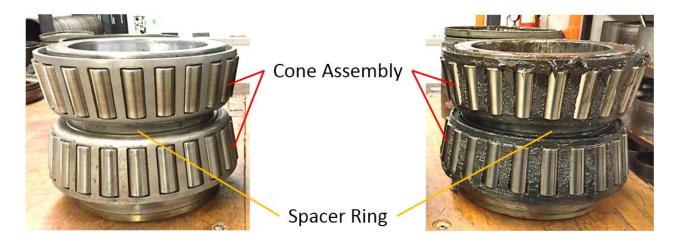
Photograph of clean (left) and lubricated (right) bearing components.
